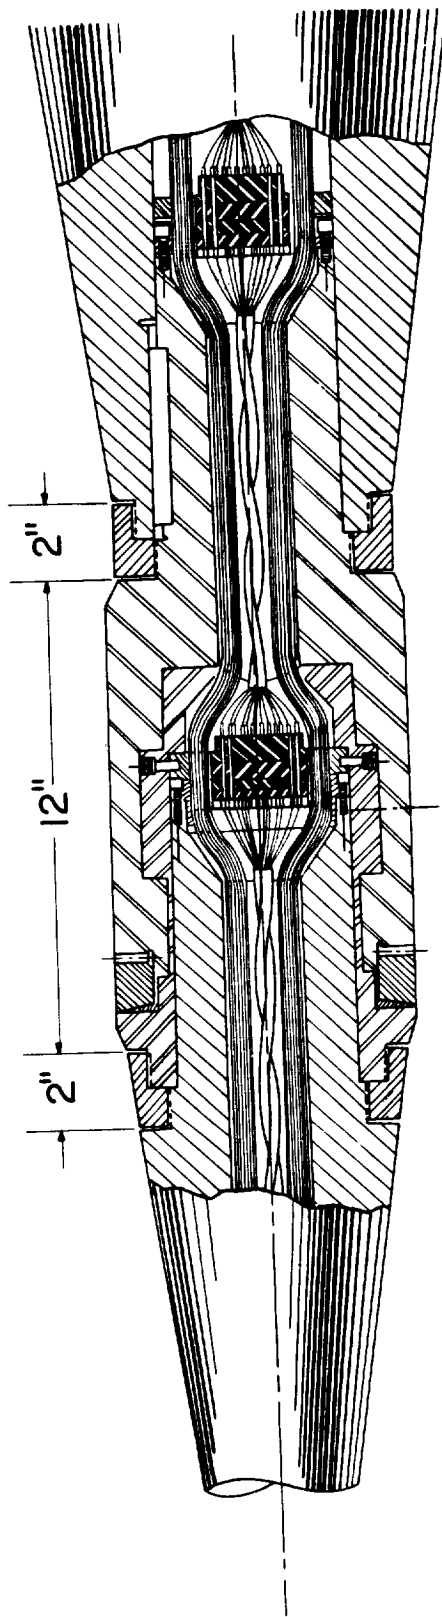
Adjustable angle coupling, Langley Unitary Plan Wind Tunnel.
